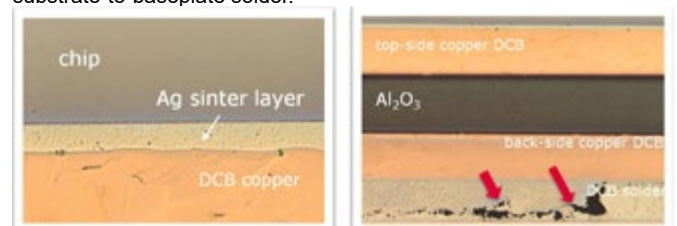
Failure mechanisms during power cycling (3, 4): Cracks are marked by red arrows. Samples with baseplate show degradation within the substrate-to-baseplate solder
